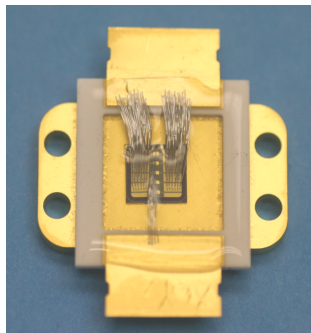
SGTO packaged at ARL using power package, AuSn die attach, 5-mil wire bonds, and silicone-based potting.
